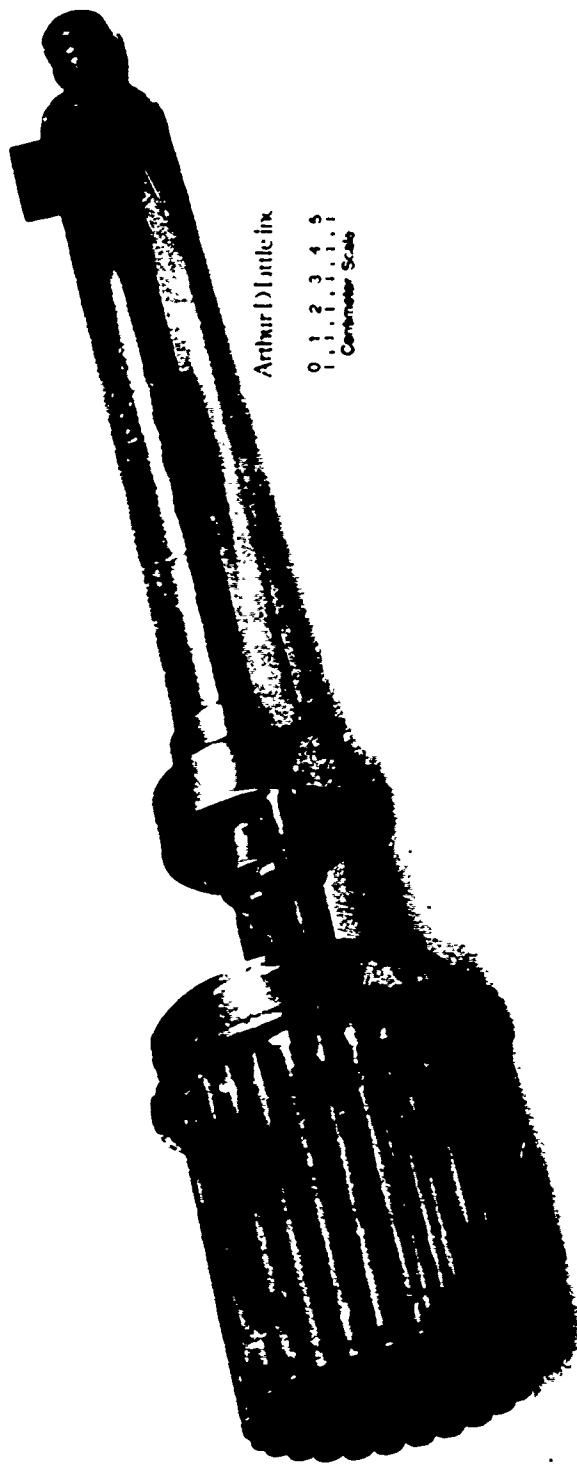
ADL COLD CRUCIBLE ASSEMBLY
